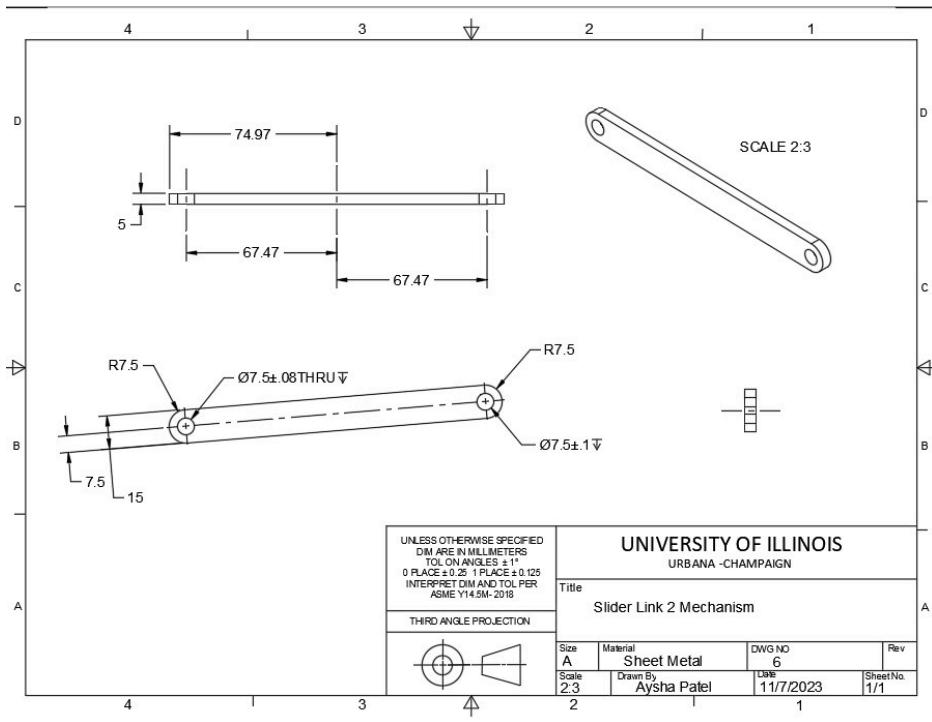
Link 2 Mechanism Dimensioned Drawing
